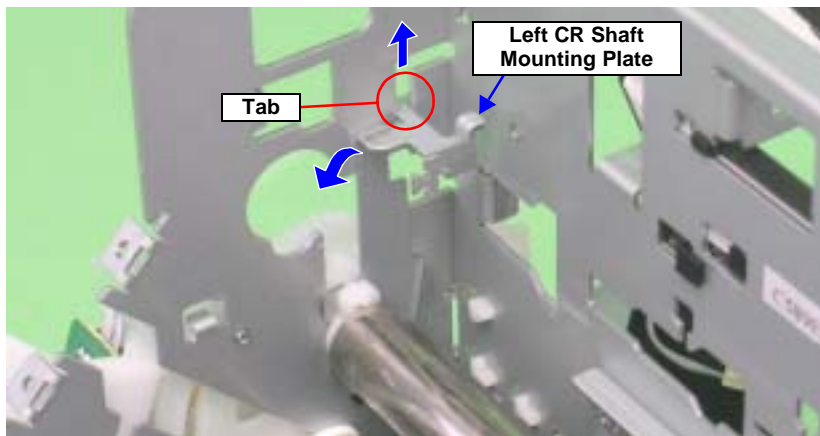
Rotating the Left CR Shaft Mounting Plate
